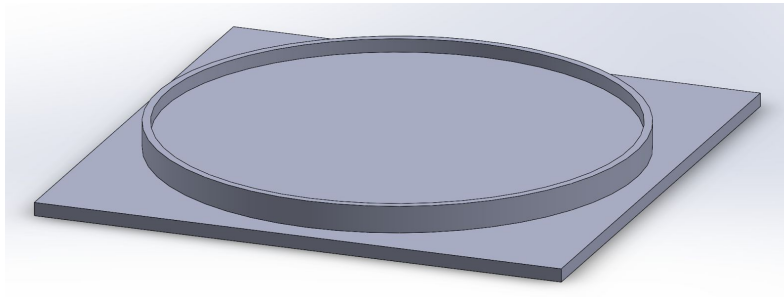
The mold centerpiece with the first four layers will be placed on top of the base piece shown. Then, ten layers will be pressed into the original four with the support of the protruding aluminum ring.
